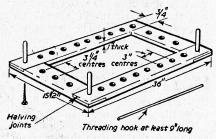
Method of constructing warping board. Pegs are 6in. lengths of broomstick sandpapered absolutely smooth. Four corner pegs should be screwed into place with long screws which pass through boards and hold frame together. Make four extra pegs for placing in any position according to length of warp required. Holes should be §in.-¾in. deep and pegs should fit tightly.
